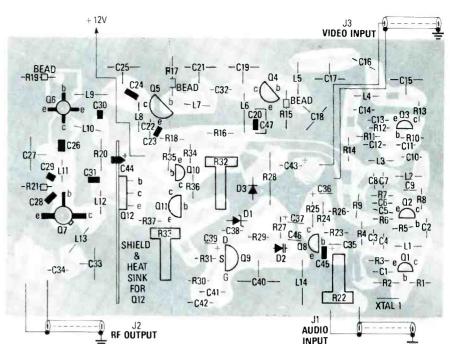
PARTS PLACEMENT DIAGRAM shows capacitor chips (C20, C23, C24, C26, C28, C29, C30, C31, C45) mounted on the solder side, as is Q6.
